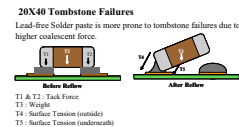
A schematic of the mechanism of tombstoning in passive assembly.
